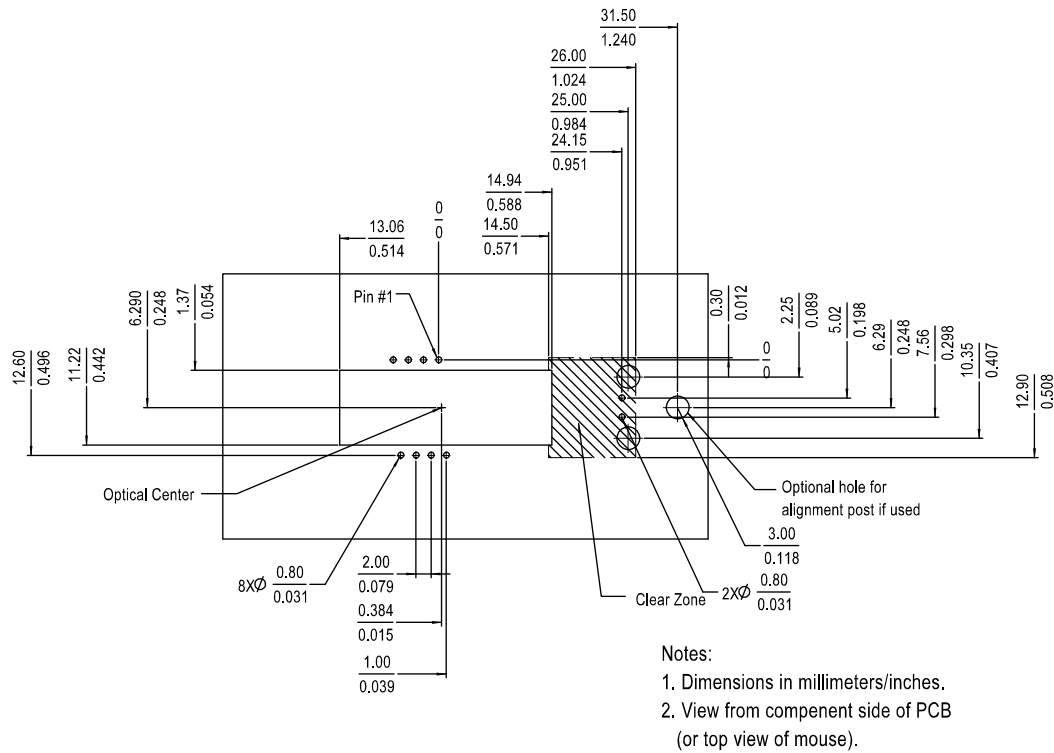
Recommended PCB Mechanical Cutouts and Spacing
